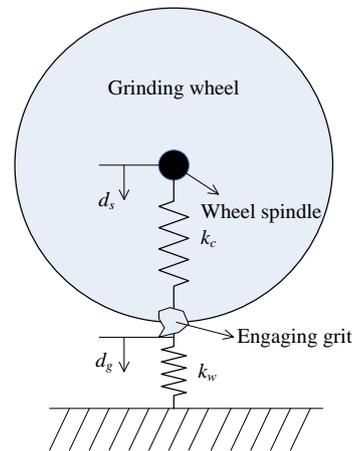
The grinding process dynamics between the wheel spindle and engaging grit
